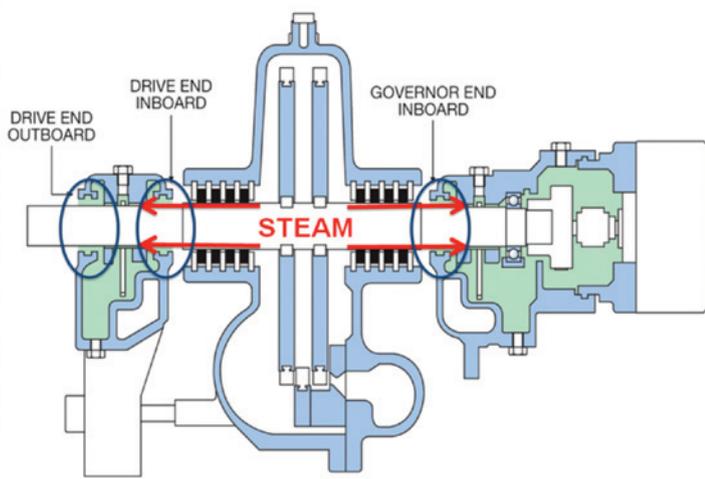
Cutaway diagram of a typical steam turbine, showing the escaping steam (red arrows) passing by the split carbon rings and simple OEM labyrinth seals (in circles), and entering the bearing housings.
